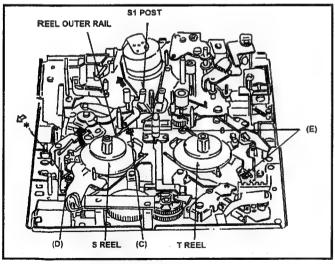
Removal of S & T Reel Rotor Unit
